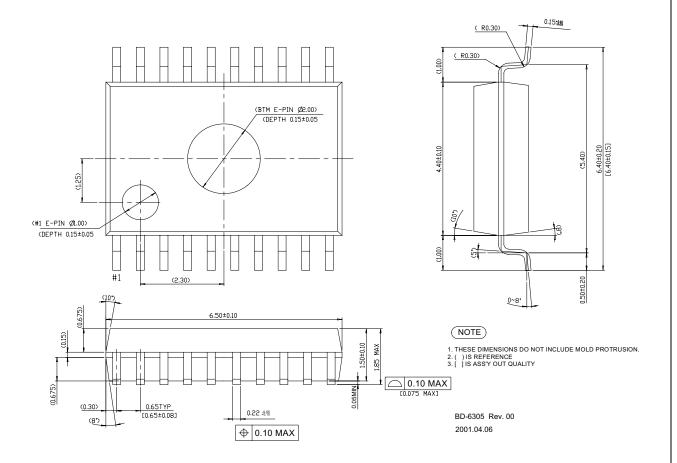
20-Lead Shrink Small Outline Package (SSOP)
